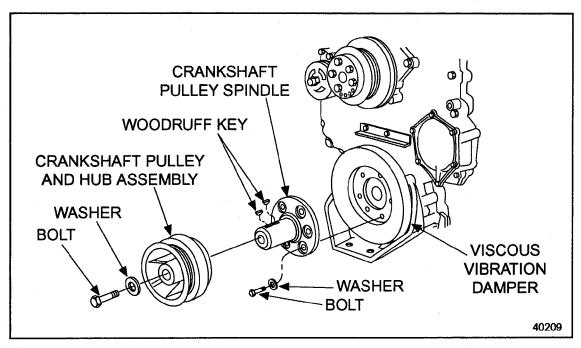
Crankshaft Pulley and Hub Assembly Installation with Spindle
